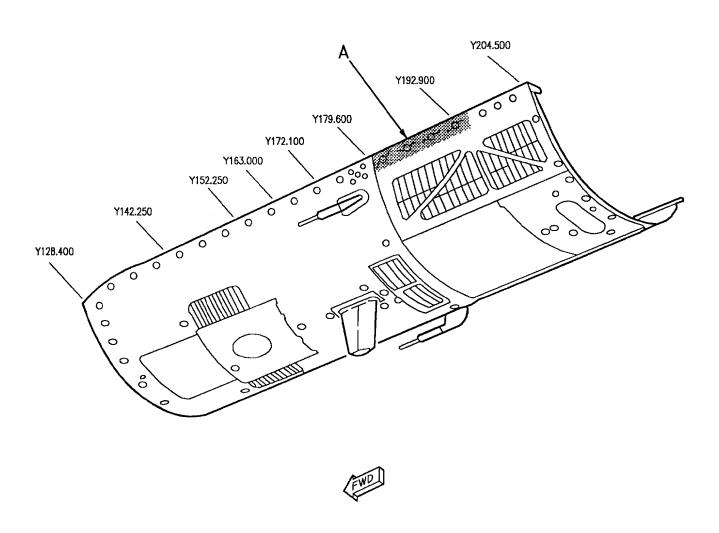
Door 3 Fastener Hole Repair (Sheet 1)
